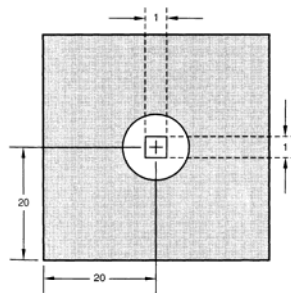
Coordinate location tolerance zone. The shaded area shows where the location of the hole could vary.
